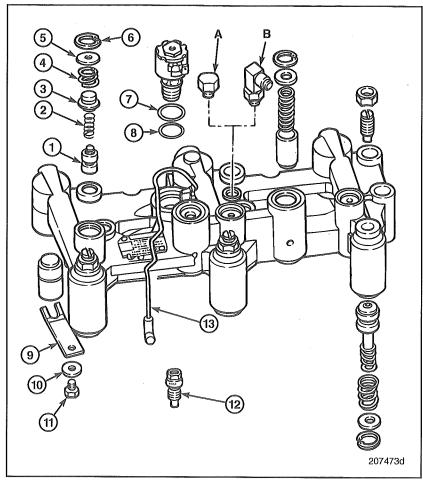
J-Tech™ Engine Brake Tune-Up Kit
